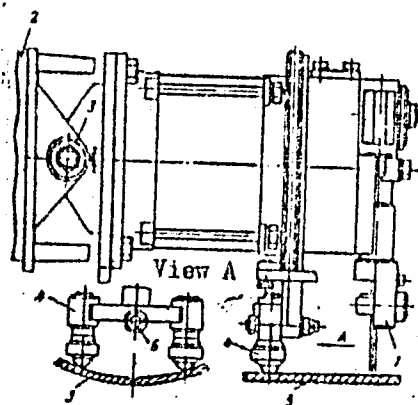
1 - welding head; 2 - arm; 3 - arm hinge; 4 - bearing rollers; 5 - boiler shell; 6 - hinge
